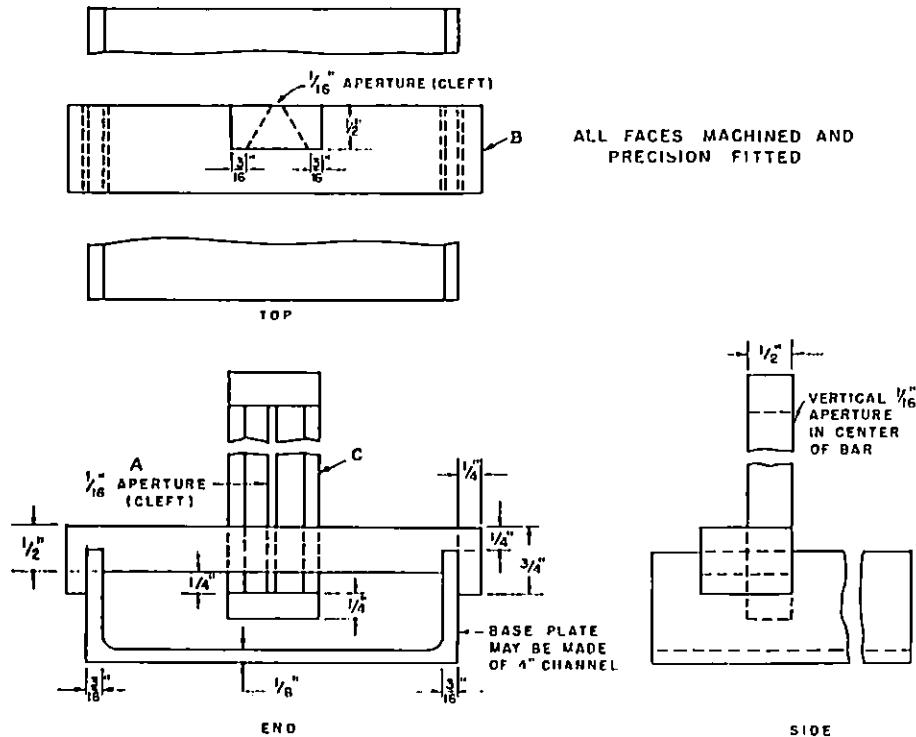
General Views of a Suitable Apparatus for Marking End Diameters Used for Alignment of Specimen in Testing Machine
